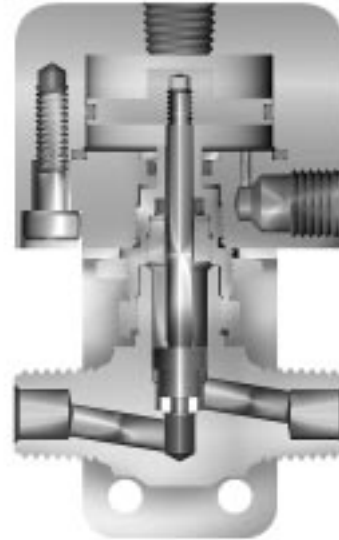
VQ-11AD Series Actuated Valve Cross Sectional View
